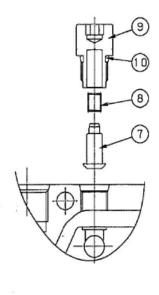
Check valve (Swing & boom swing, dozer, arm 3 & boom 3, service, arm, boom, bucket, arm 2)
